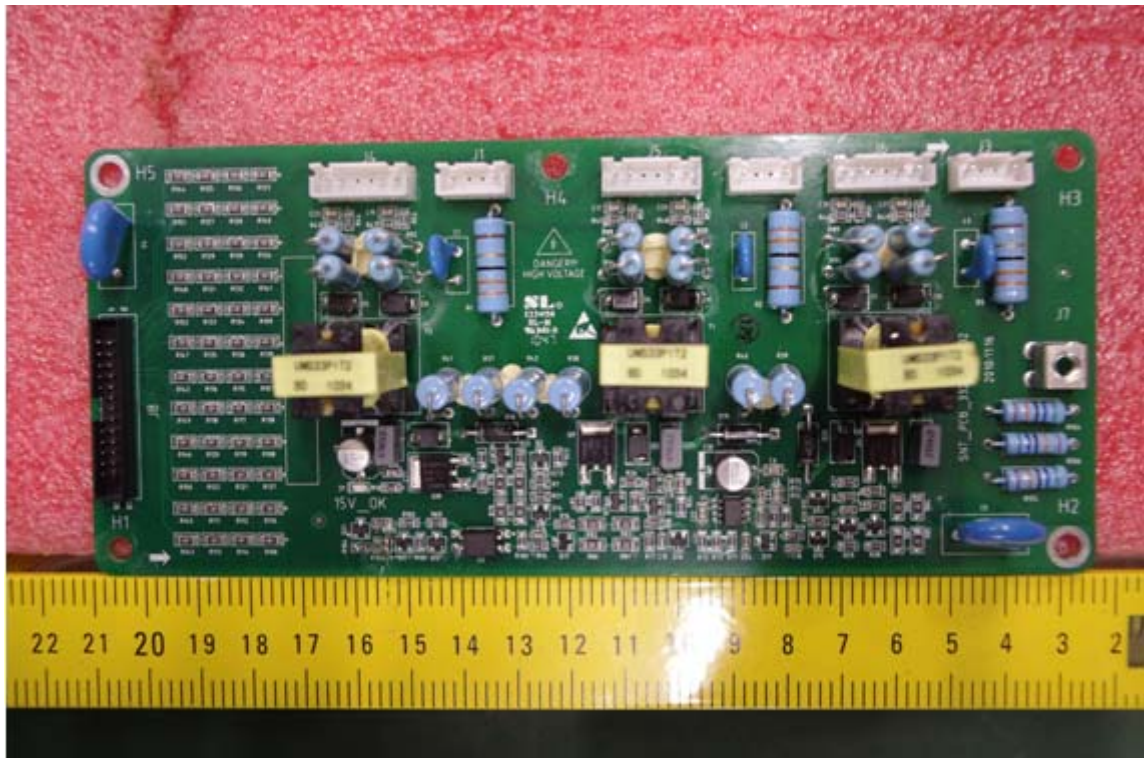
Board SNT\_3320\_PCB\_CQ, components side view
